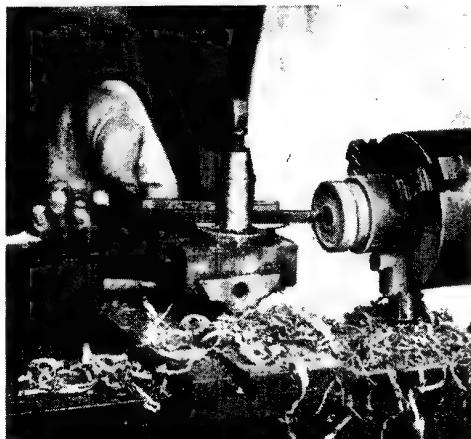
Square spindles and holes for turning knobs ensure secure fixing. Such a knob is being fitted. It is held in position by means of a screw and washer fitted into a recess in the outer face of the knob and afterwards covered by an ebonite disk
